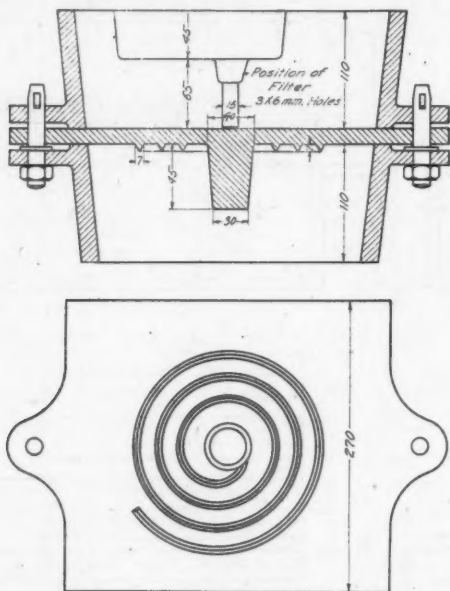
EQUIPMENT FOR MOLDING THE CURY FLUIDITY TEST PIECE
